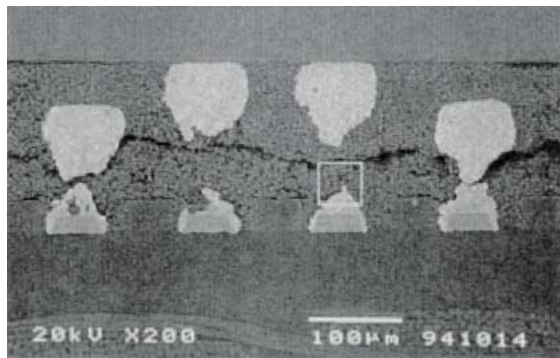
Failure Mechanism (Cracking due to plastic swelling) in the PCT Test
